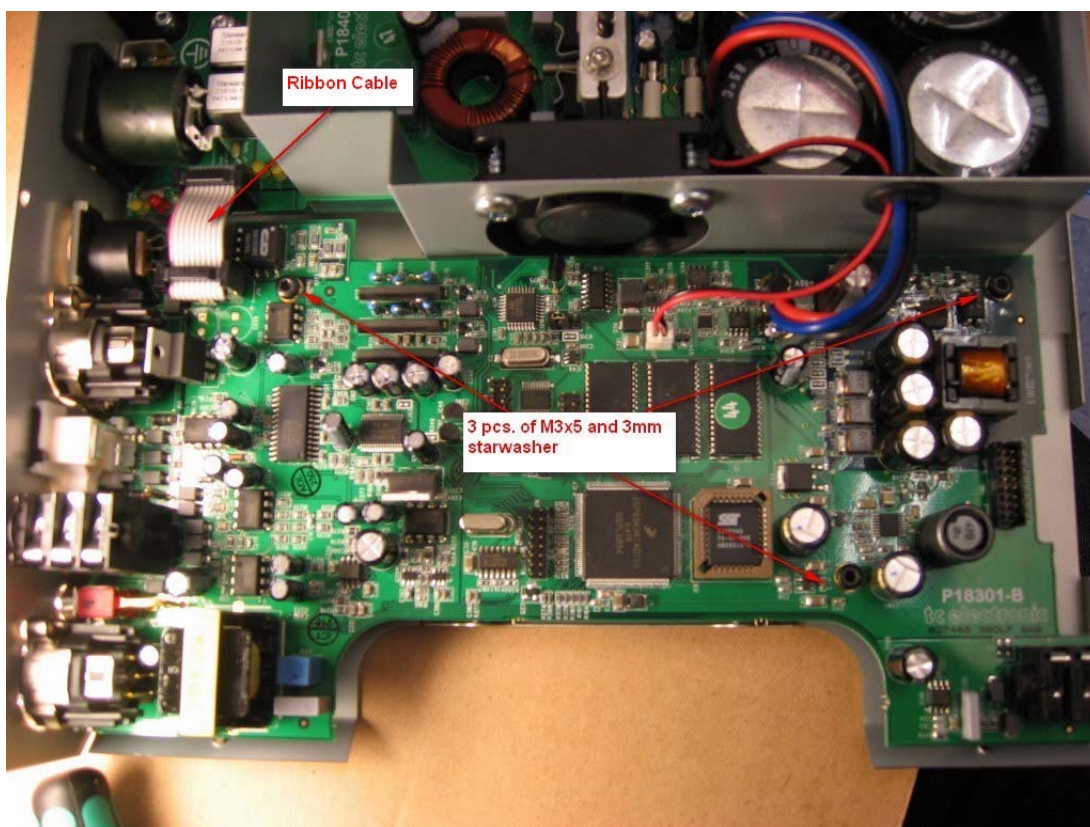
Secure the main board with 3mm screws and washers and mount the Ribbon cable.
